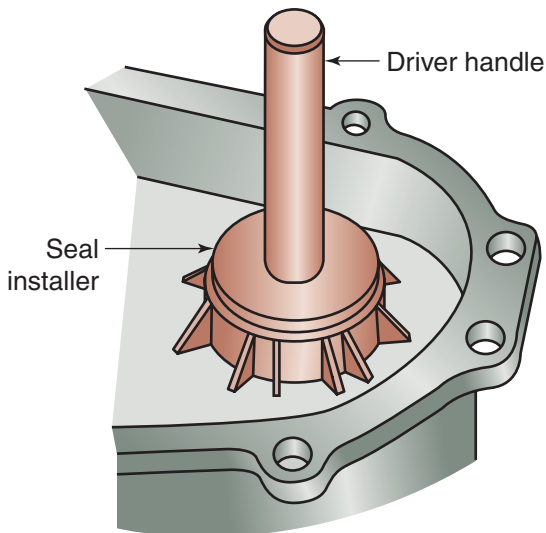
Seals need to be installed correctly and evenly by using a special seal installation driver that rests on the outside of the seal.
